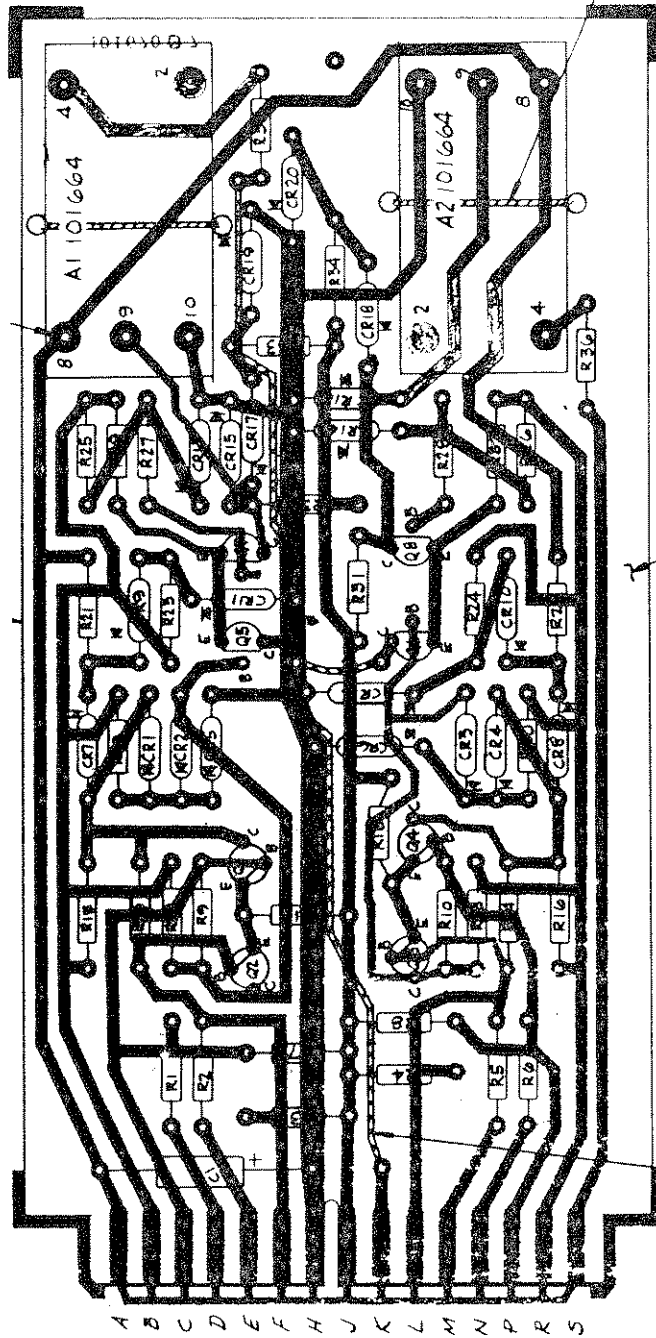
Option 103 Main Frame Card A7 Flip-Flop and Switches, Parts Location (Drawing No. 101670C)
